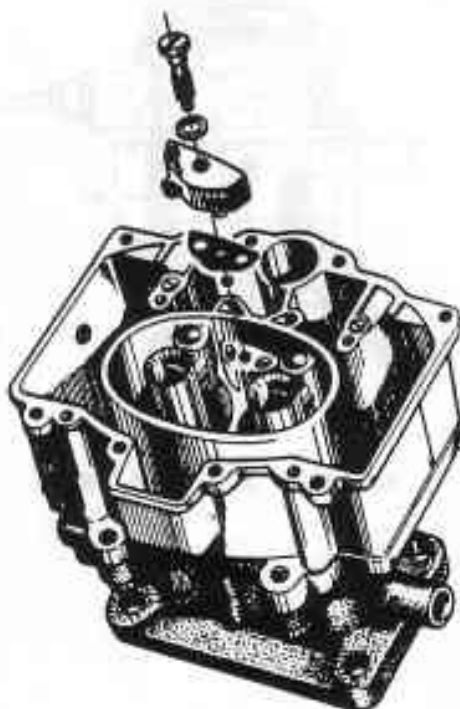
ASSEMBLY OF ACCELERATOR PUMP NOZZLE.
